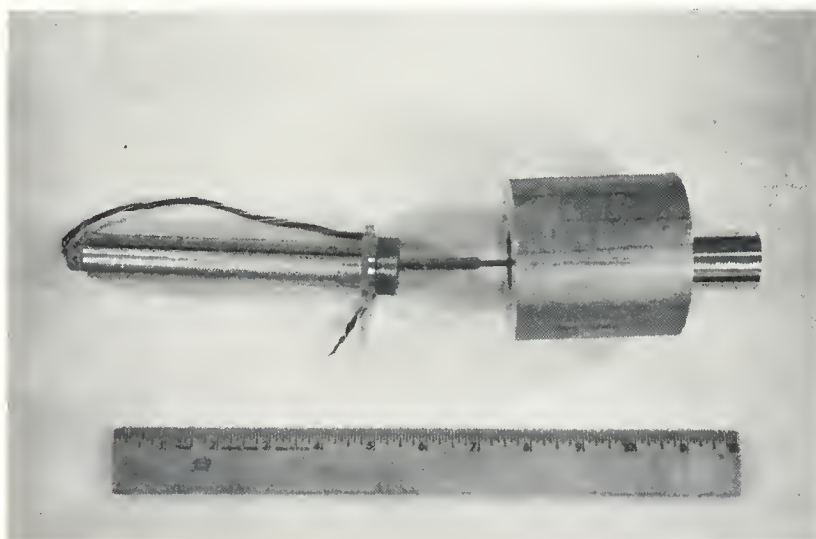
HOLDER ASSEMBLY - PARTIALLY ASSEMBLED
